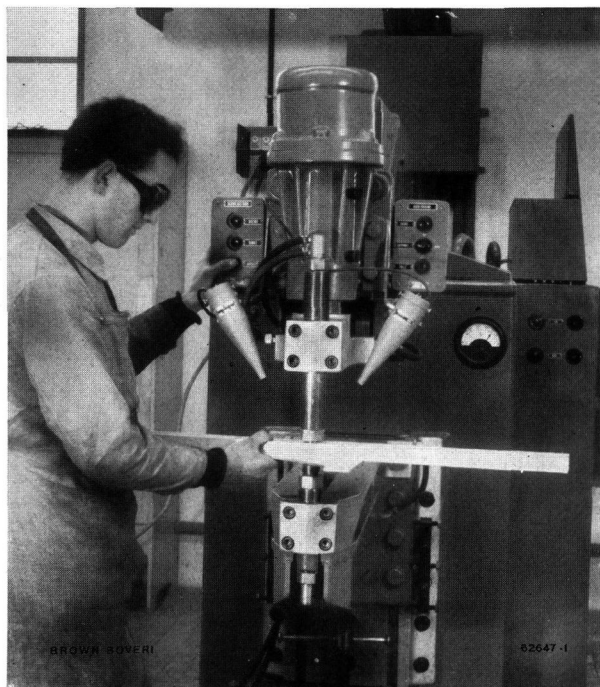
Front view of spot welder shown in Fig. 83.
